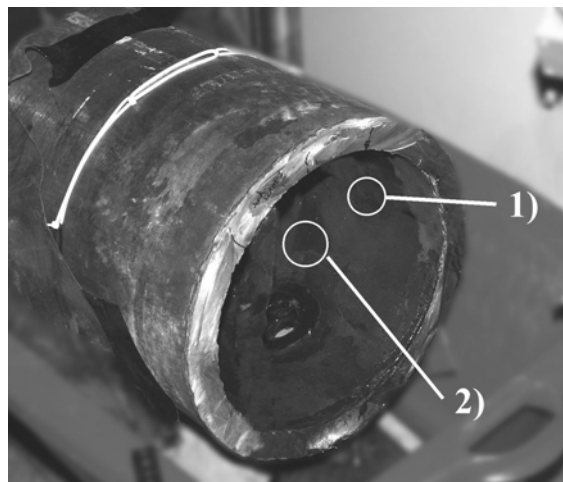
Austenitic stainless steel pipe: 1) circumferential and 2) axial thermal fatigue crack (pipe diameter 450 mm, wall thickness 30 mm).
